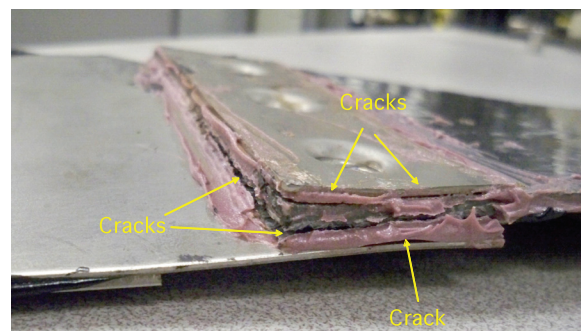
Cracks visible at corner of composite-to-steel weld bonded joint that had been loaded in torsion.
